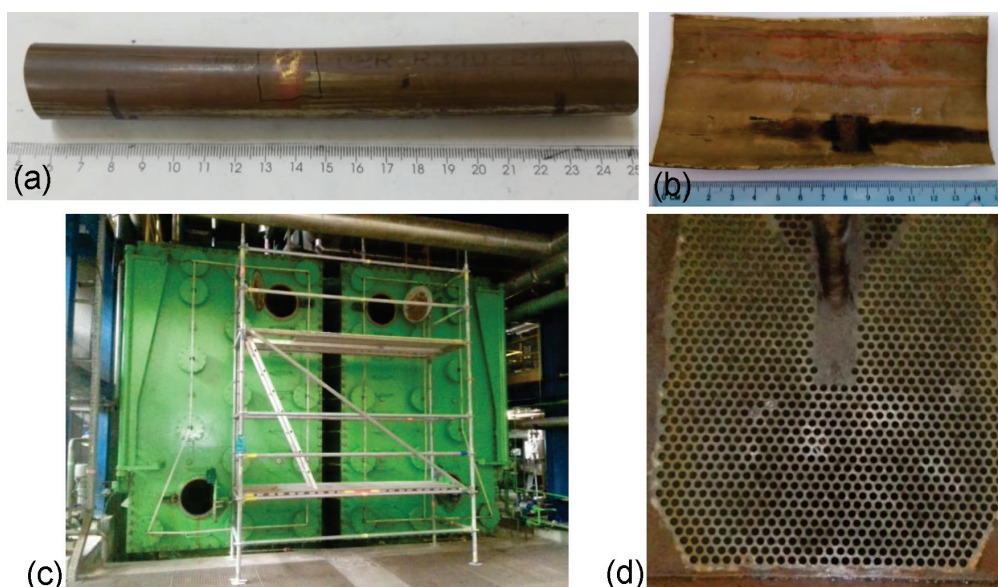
Photographs of: a) the ruptured tube segment, b) the interior of the non-ruptured tube segment, c) condenser, d) tubes in the condenser
